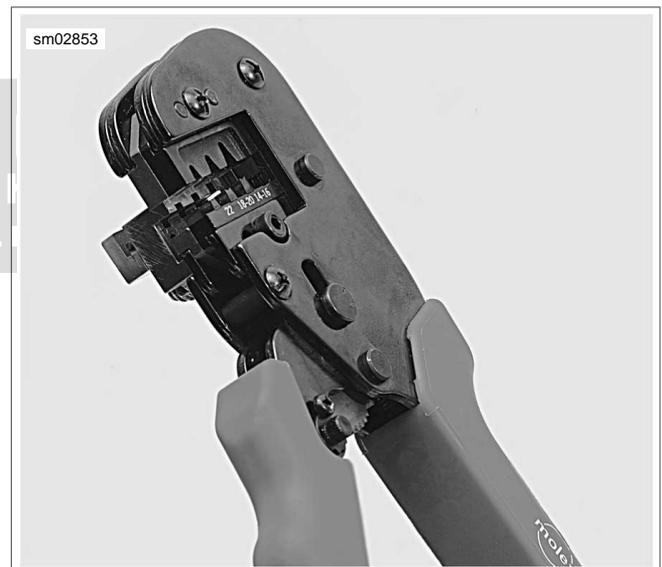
Open Electrical Crimp Tool (HD-48119) at 45 Degrees
